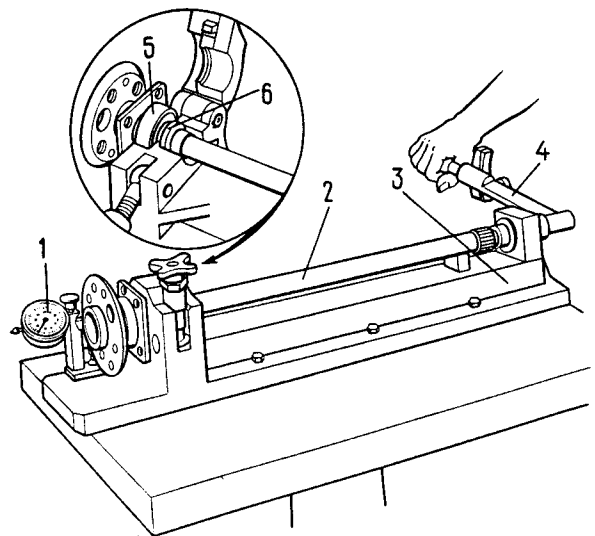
Checking Fit of Axle Shaft Bearing Lockring:
